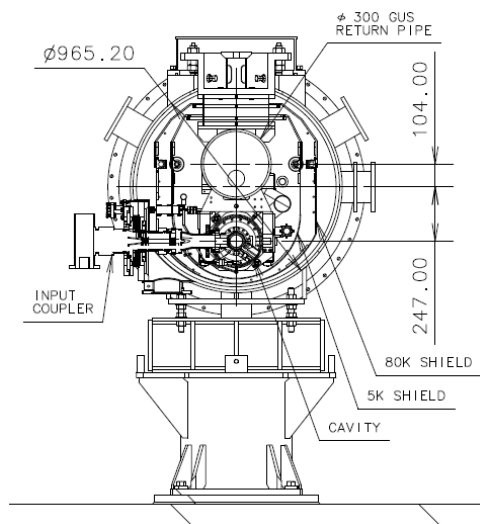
Cross-section view of Module-A designed to hold the KEK cavities.
